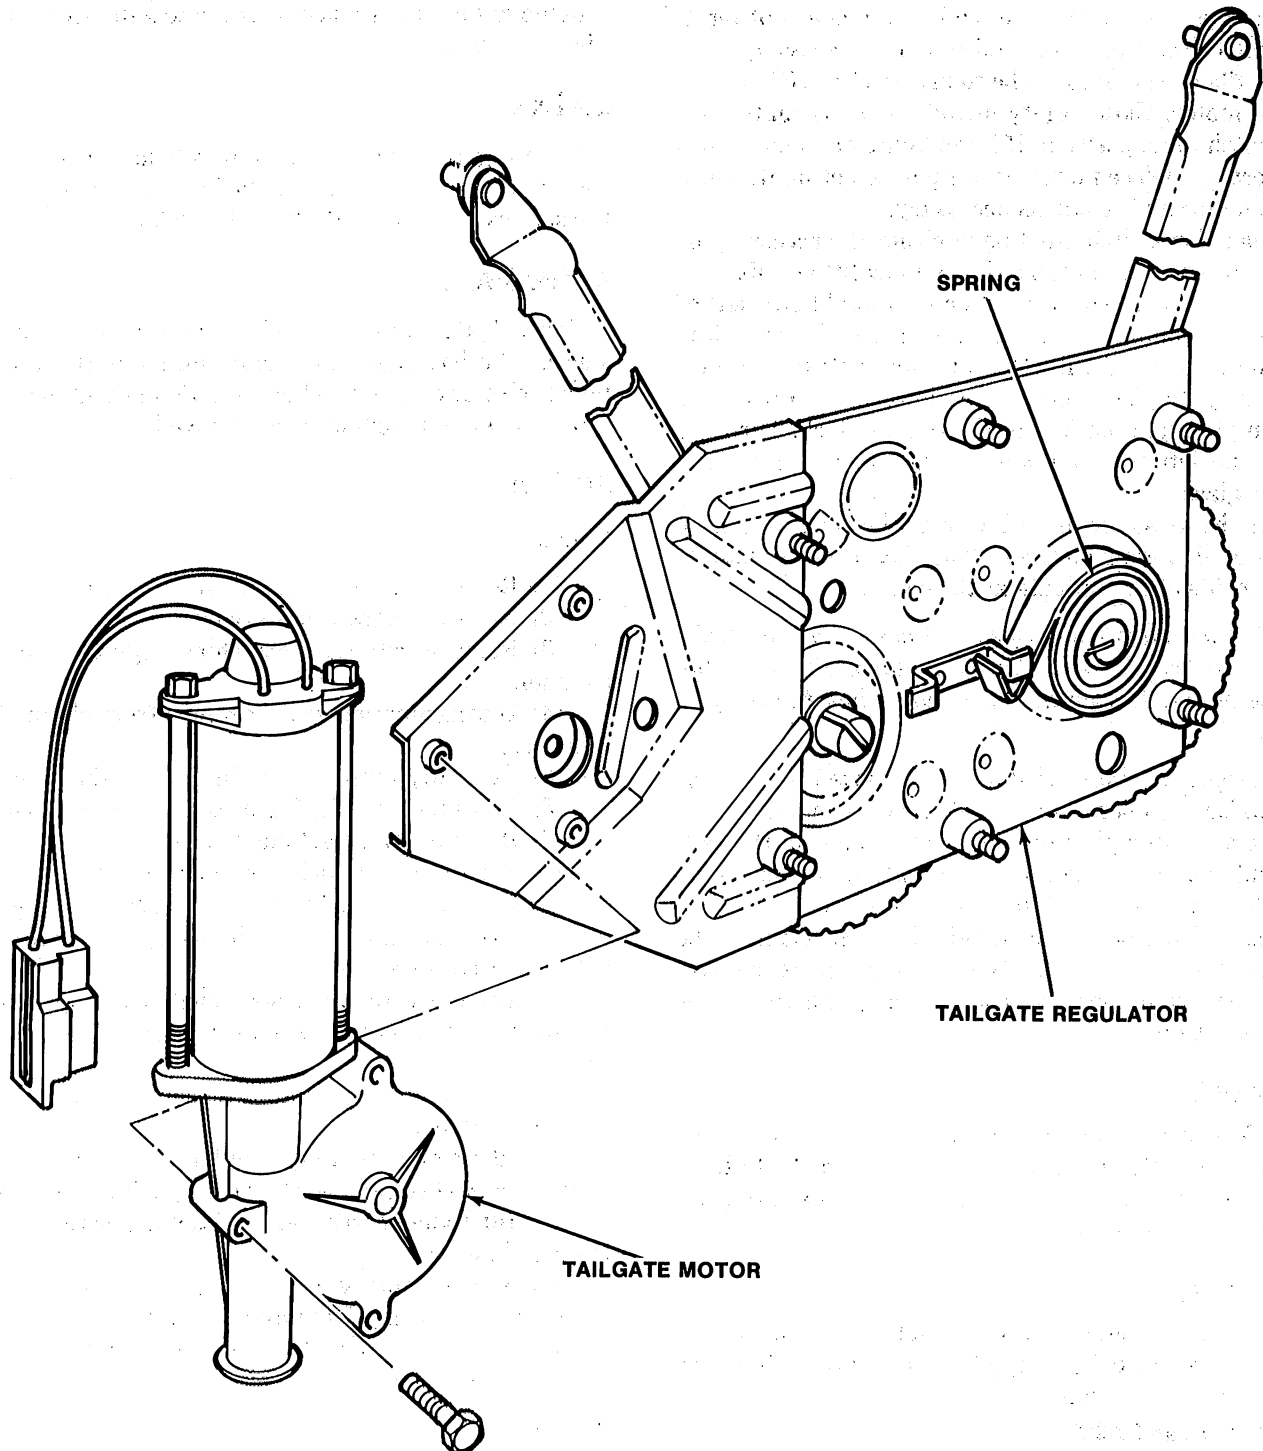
H-5 Power Tailgate Window Regulator and Motor
